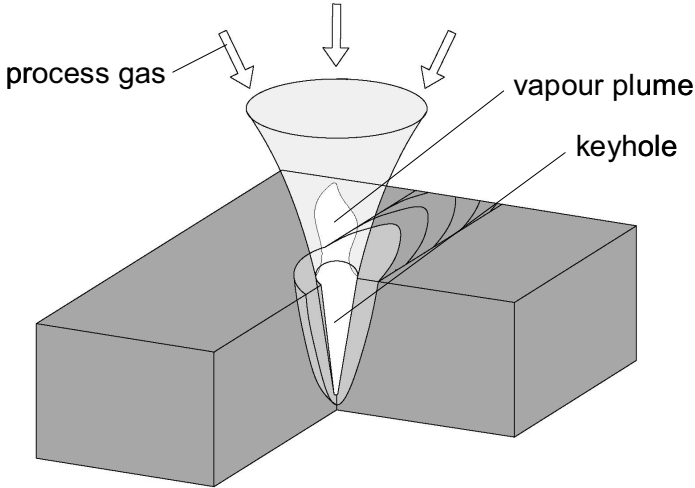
Laser keyhole welding: beam caustic is indicated by a cone, welding direction out of page alongside elevation
